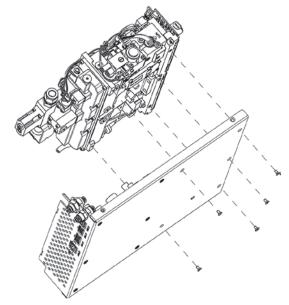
Removing Manifold/RFID Assembly from Chassis Plate
